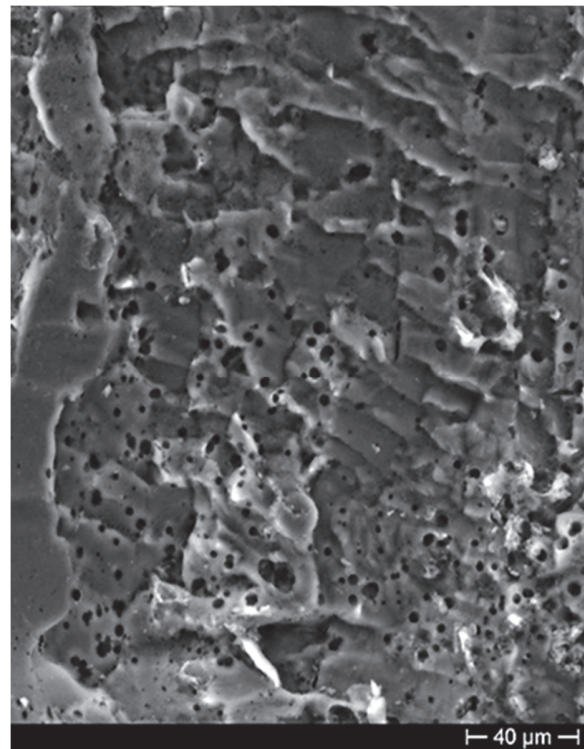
Pits formed on the fracture surface of 7050 T7451 alloy.
